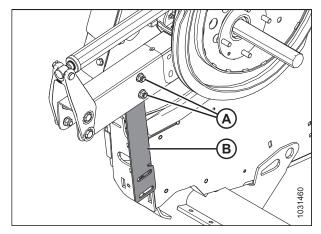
Outboard Reel Arm Support – D1X Series Header
